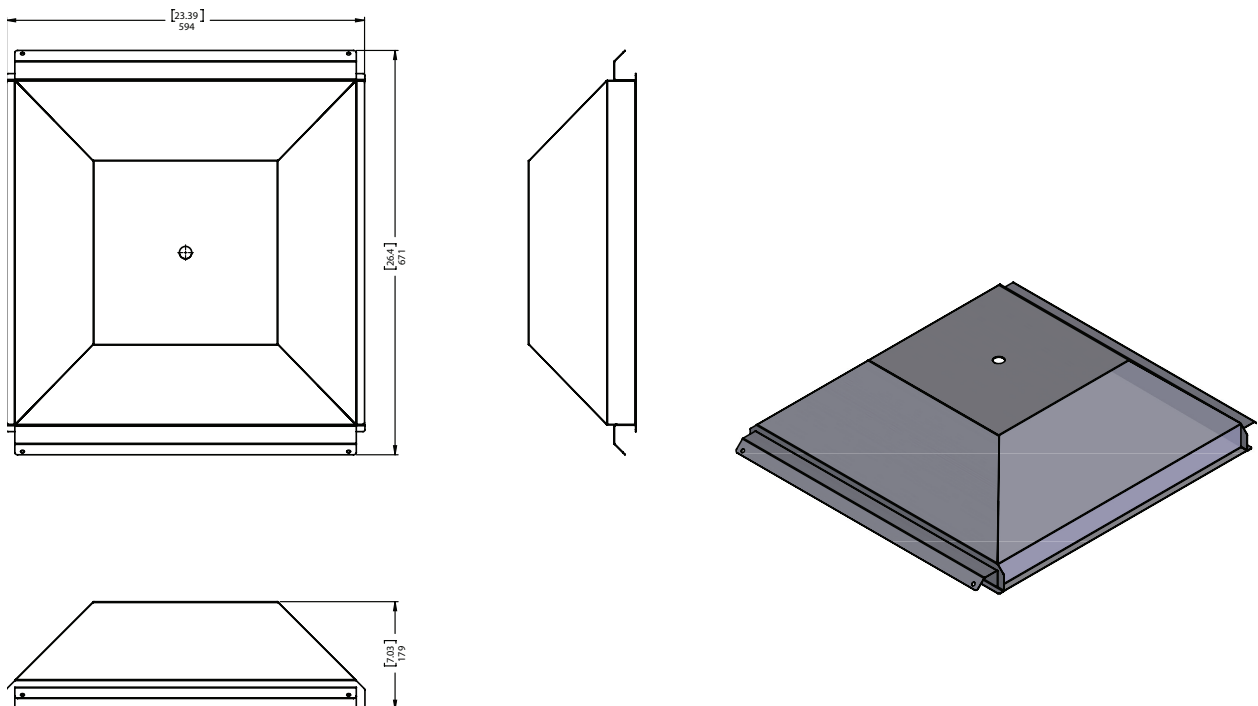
Recessed-mount Rigging Kit (RCT-24) Top and Side Views [Inches] Millimeters
